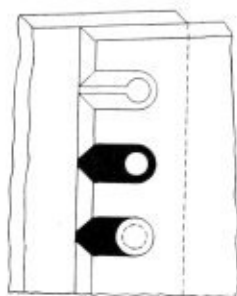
(Left) Fire cracks on girth seams may be welded in this manner. Fig. 2.—(Below) Details for designing diagonal patches on return tubular boilers
